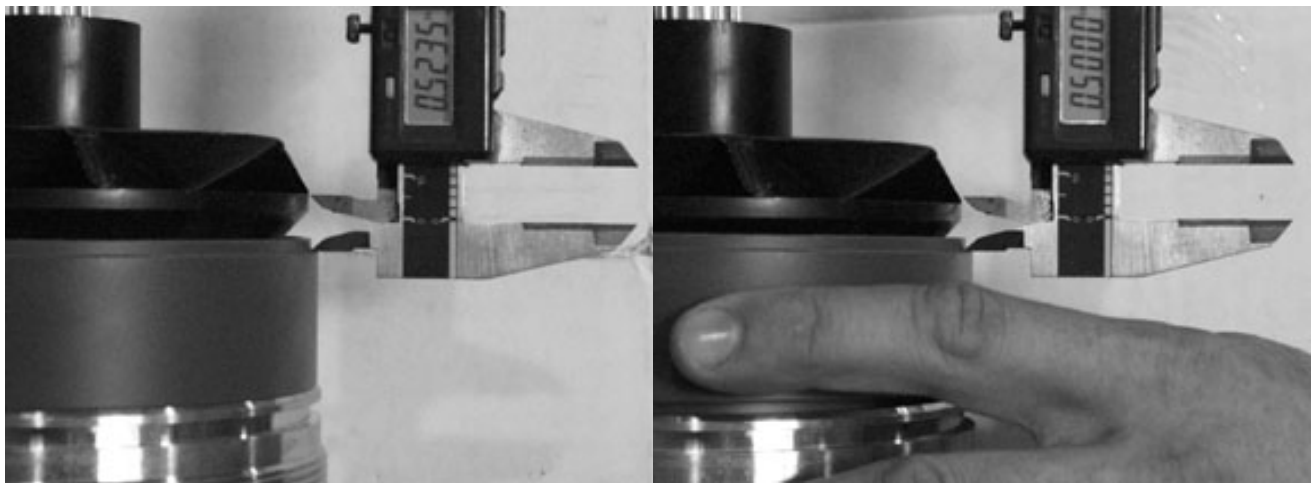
Set the Gap Using Measurements at the Edge of the Parts
